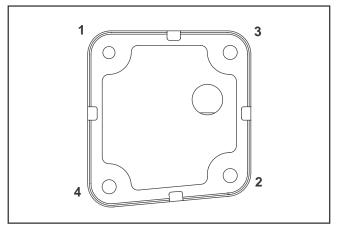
Breather Assembly Fastener Torque Sequence.
